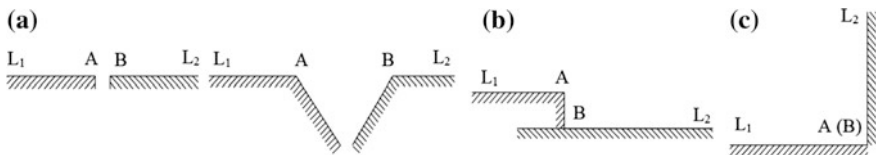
Three main types of weld joint: a butt joint; b lap joint; and c fillet joint
